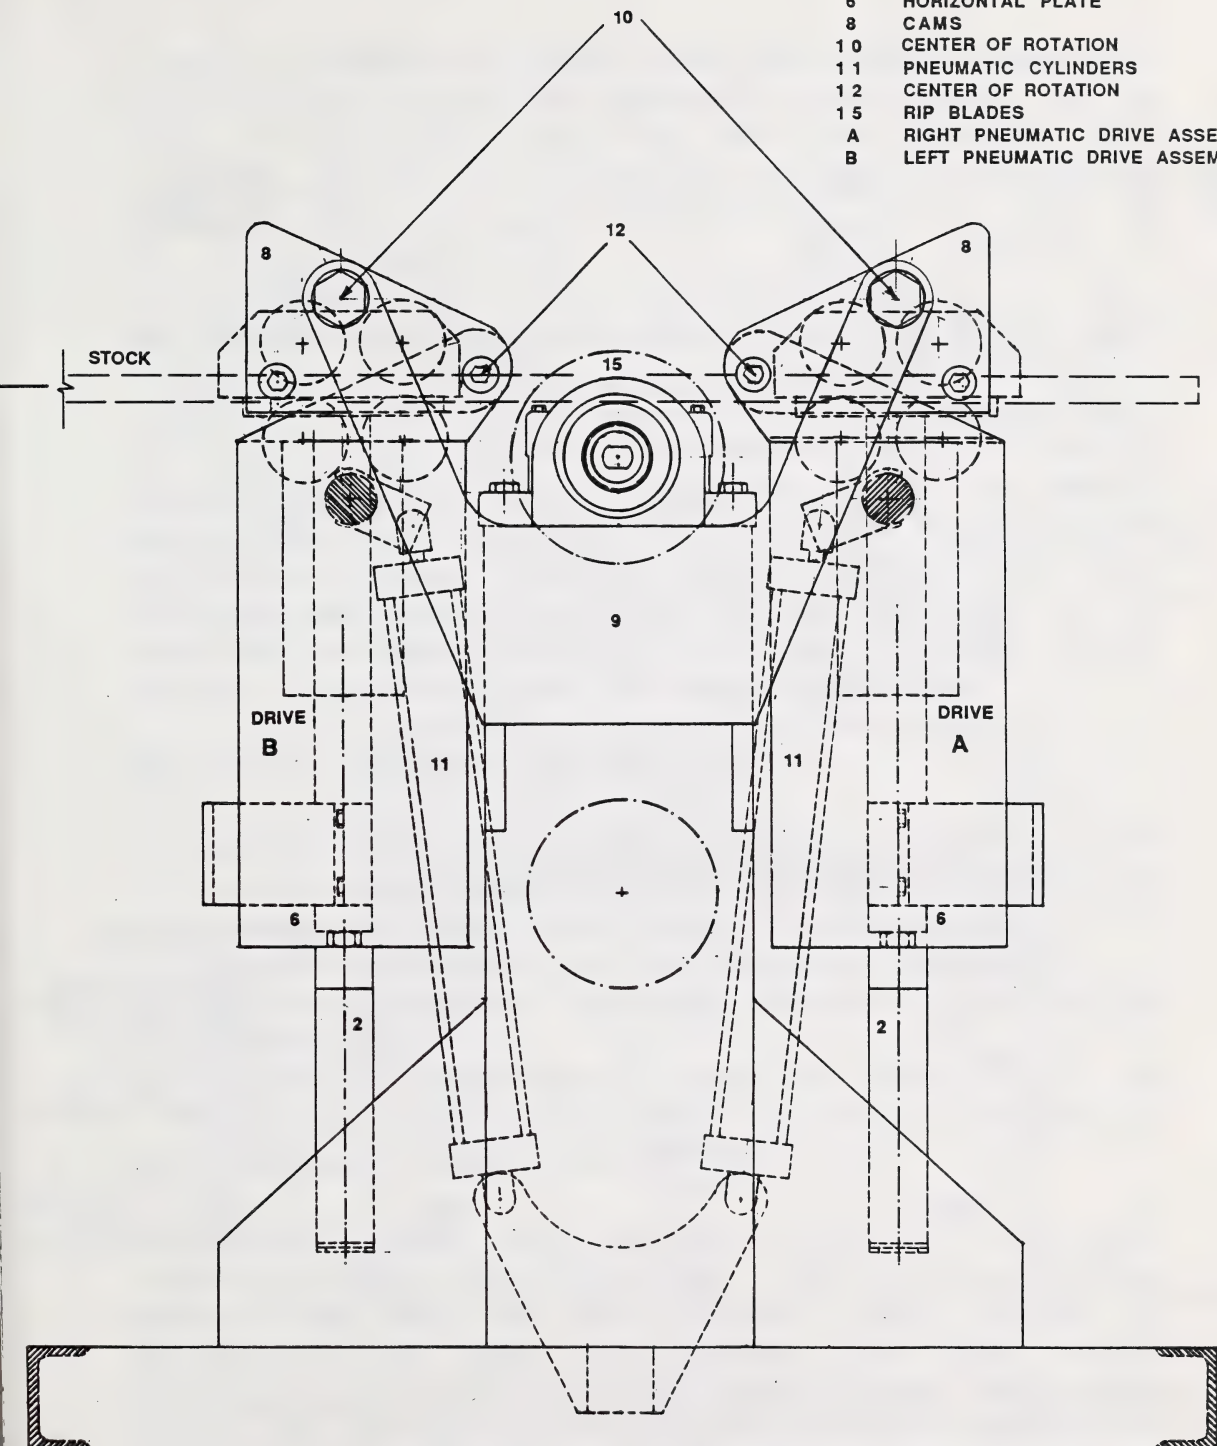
Curvilinear Multi-Rip Saw (Front View)
